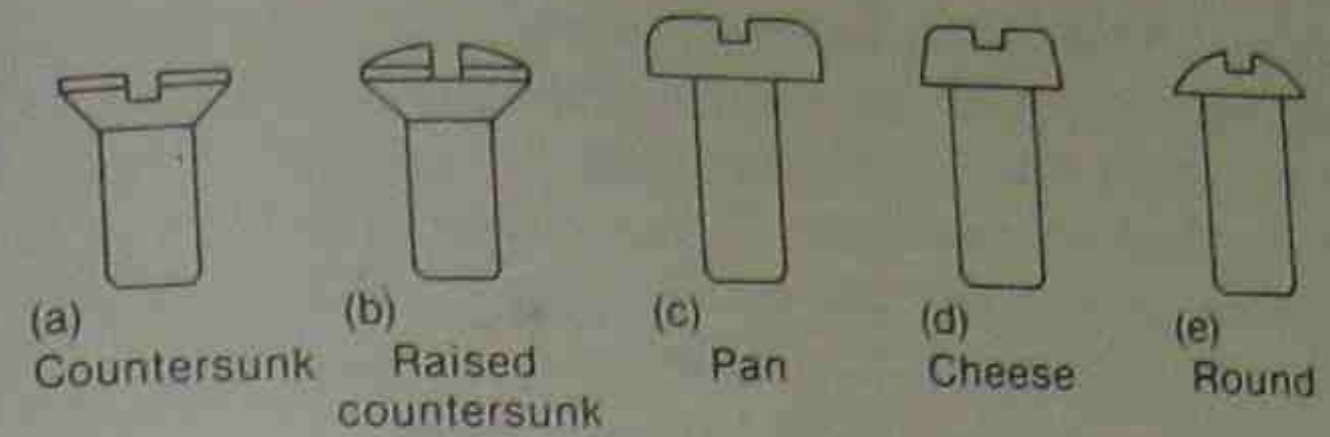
Machine screw head styles (a) countersunk (b) Raised countersunk (c) Pan (d) Cheese (e) Round
